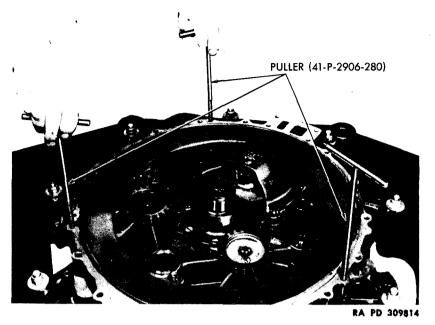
Removing Crankcase Diffuser Section From Rear Section
